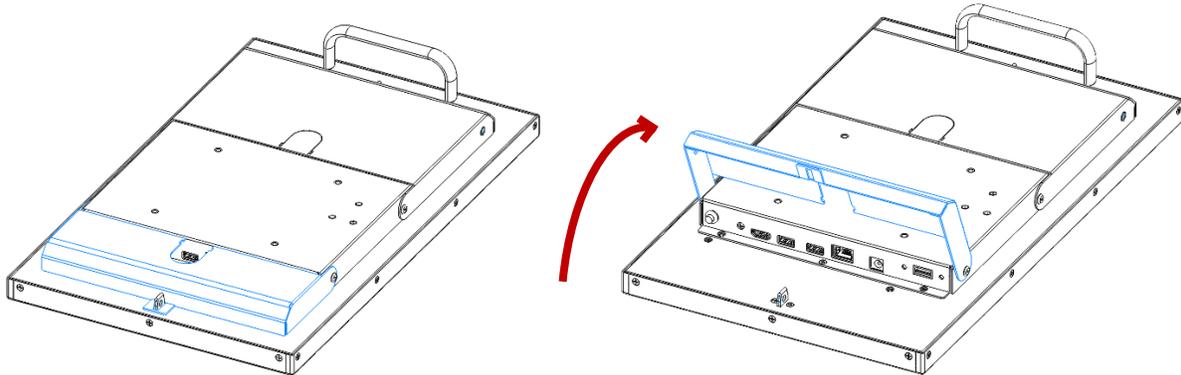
D: SYSTEM ISOMETRIC BACK VIEW, OPENING THE BOTTOM COVER
